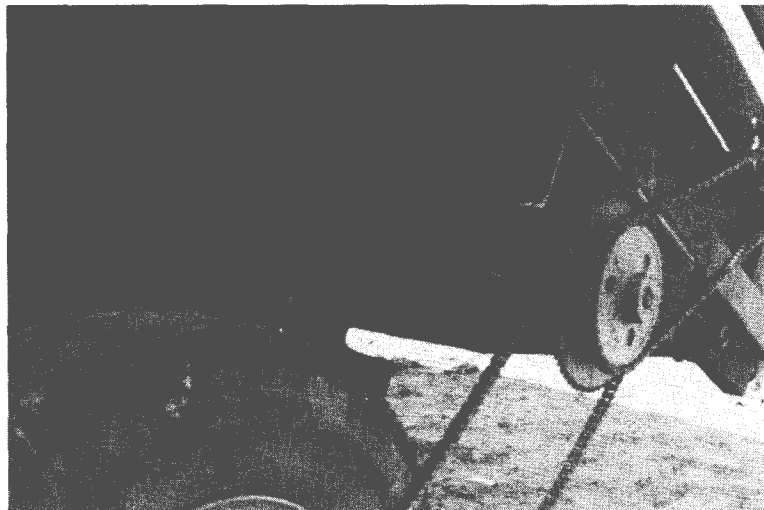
Side view of dump body showing installation of agitator drive mechanism.
